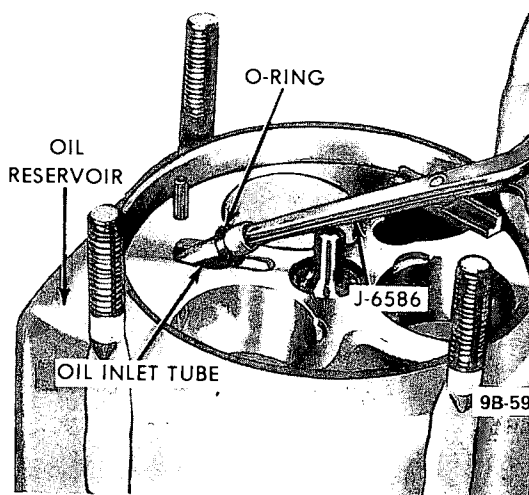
B-84 Removing Oil Inlet Tube - 6 Cylinder Compressor
